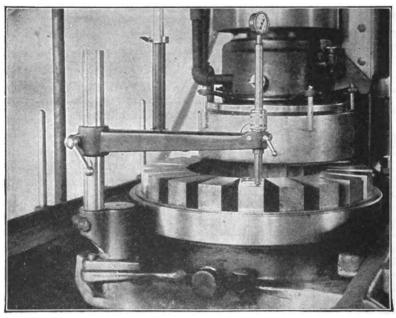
Continuous-reading caliper on Blanchard high-power vertical surface grinder.
